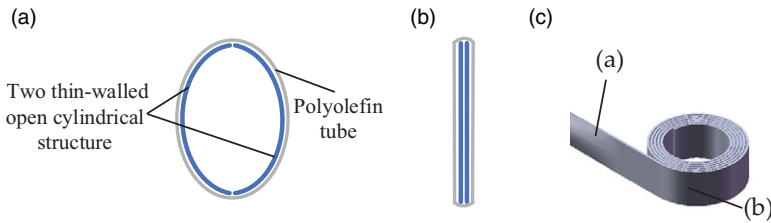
Diagram of a double C-shaped tape spring. (a) Cross-section; (b) Cross-section after folding; (c) Coiled tape spring.
